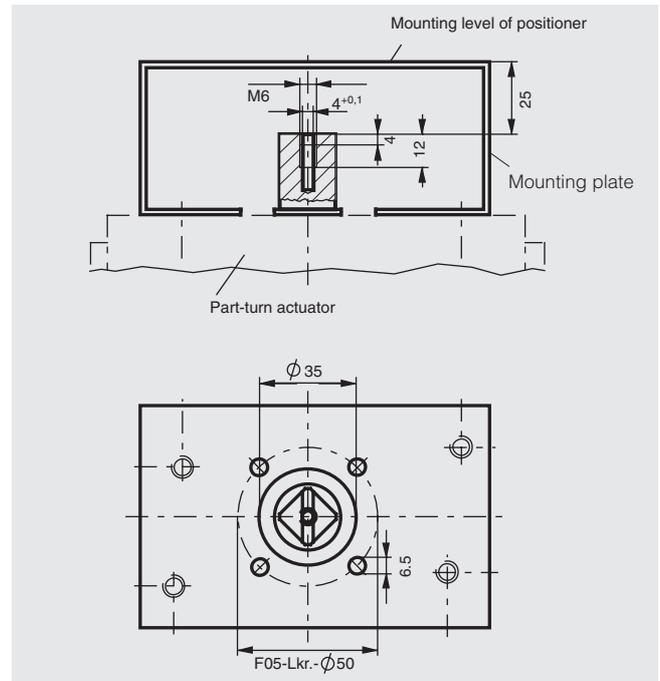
/15 Mounting onto part-turn actuators; mounting plate (scope of delivery of actuator manufacturer), extract from VDI/VDE 3845, dimensions
